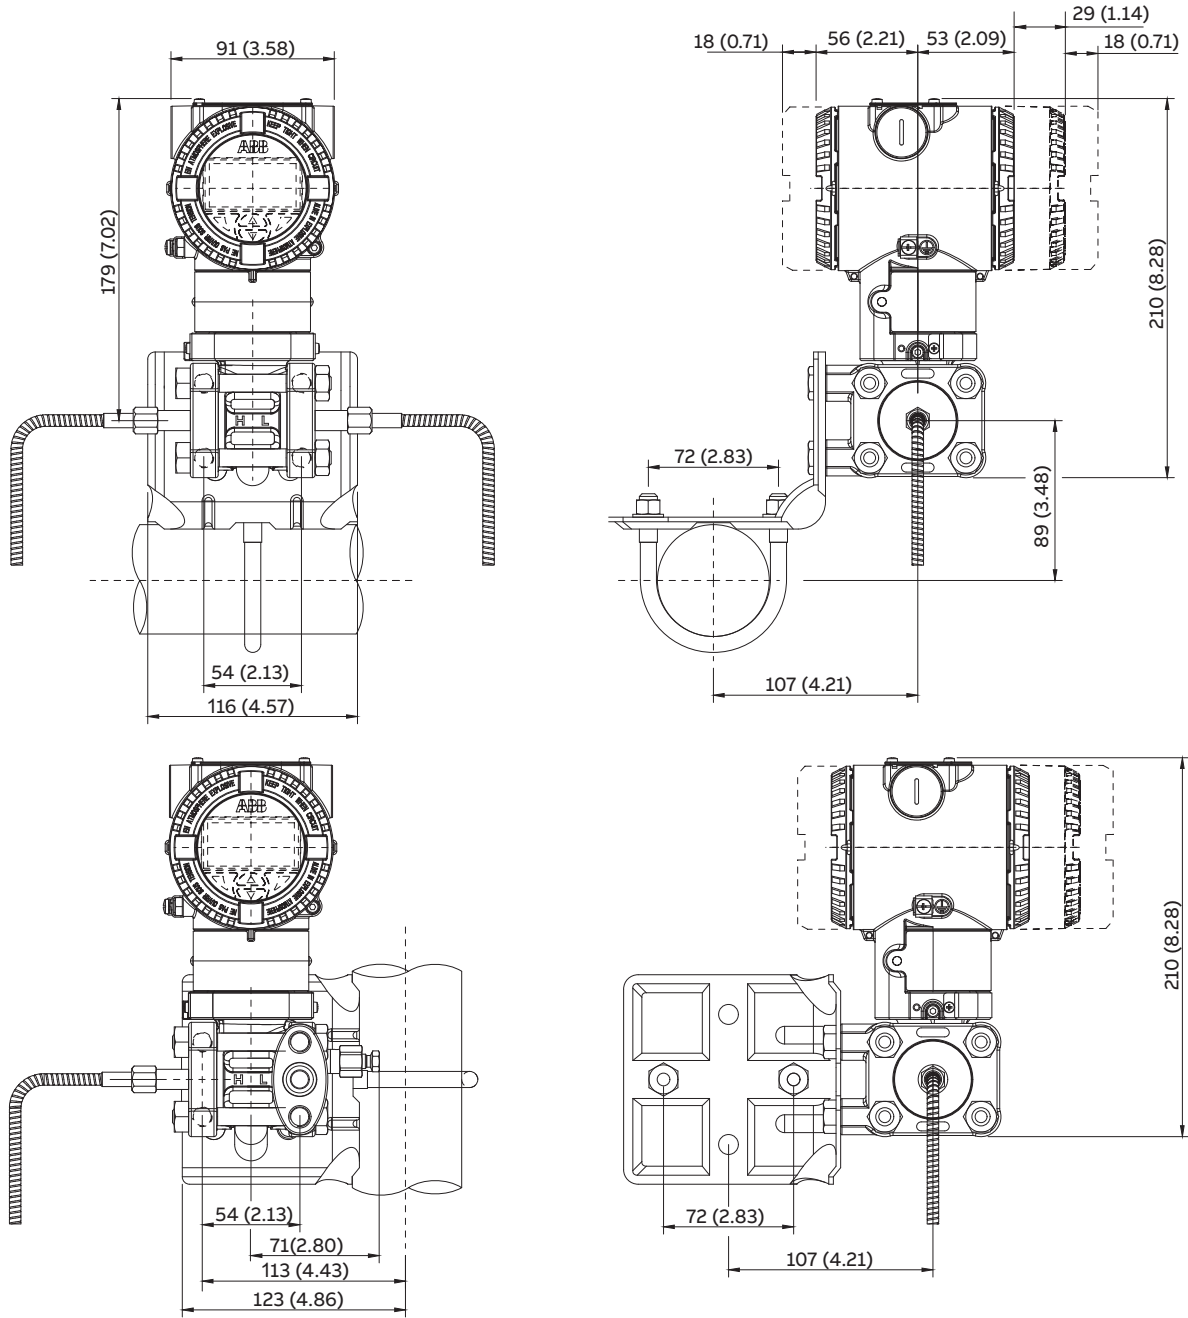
Pipe mounting - barrel housing, Dimensions in mm (in)
